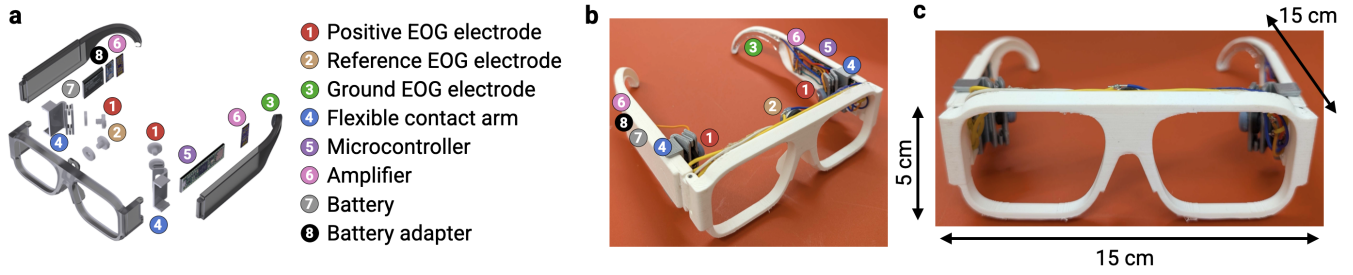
Hardware design. (a) Exploded CAD design illustrating the different components of the hardware design. (b) Fabricated design annotated with location of different components. (c) Front-view of glasses with dimensions.
